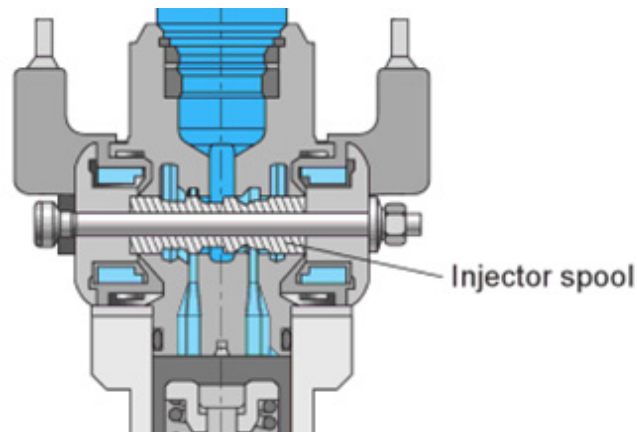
Section view of HEUI oil spool, showing the spool valve mechanism [9-15]
